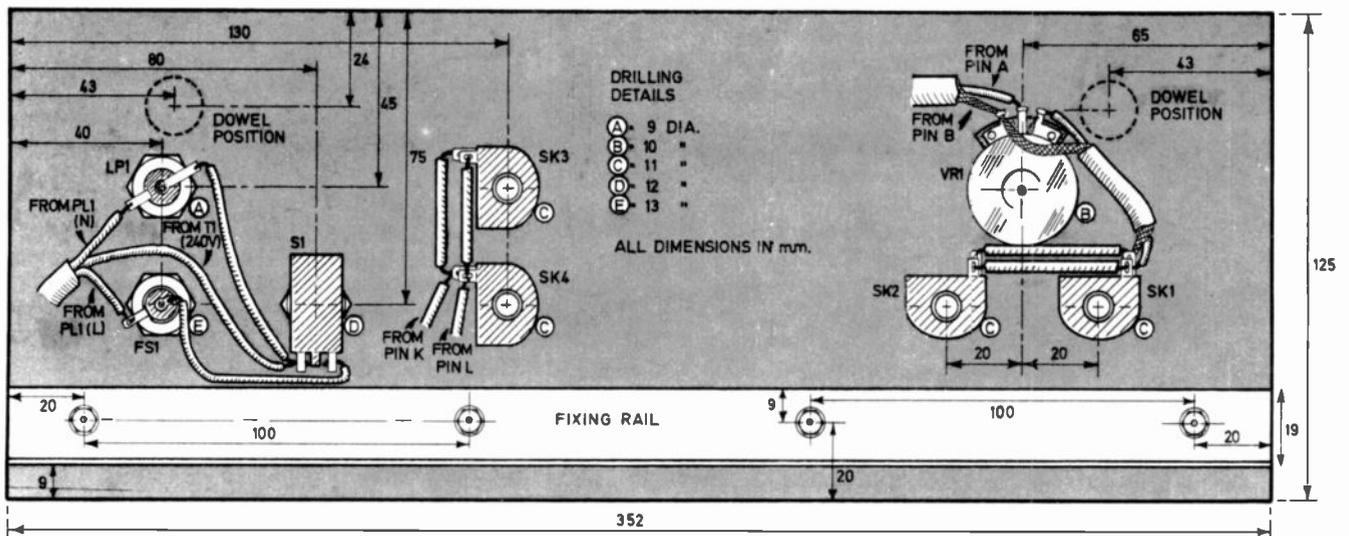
Shows dimensions and drilling instructions for the front panel showing positions of components (viewed from rear) and connection details to other components. Aluminium or steel plate is recommended in place of the plywood employed in the early prototype shown in the photograph.
